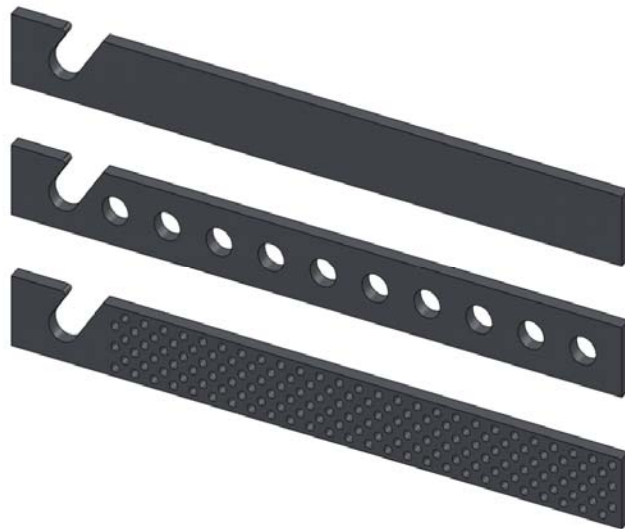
Sample configurations: Solid, large holes, and small holes
